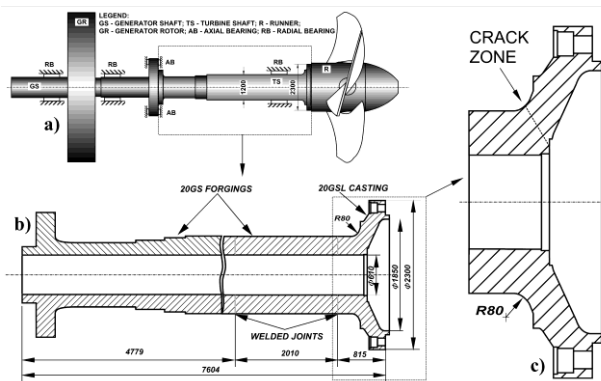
Position of crack on general assembly of hydraulic turbine shaft
